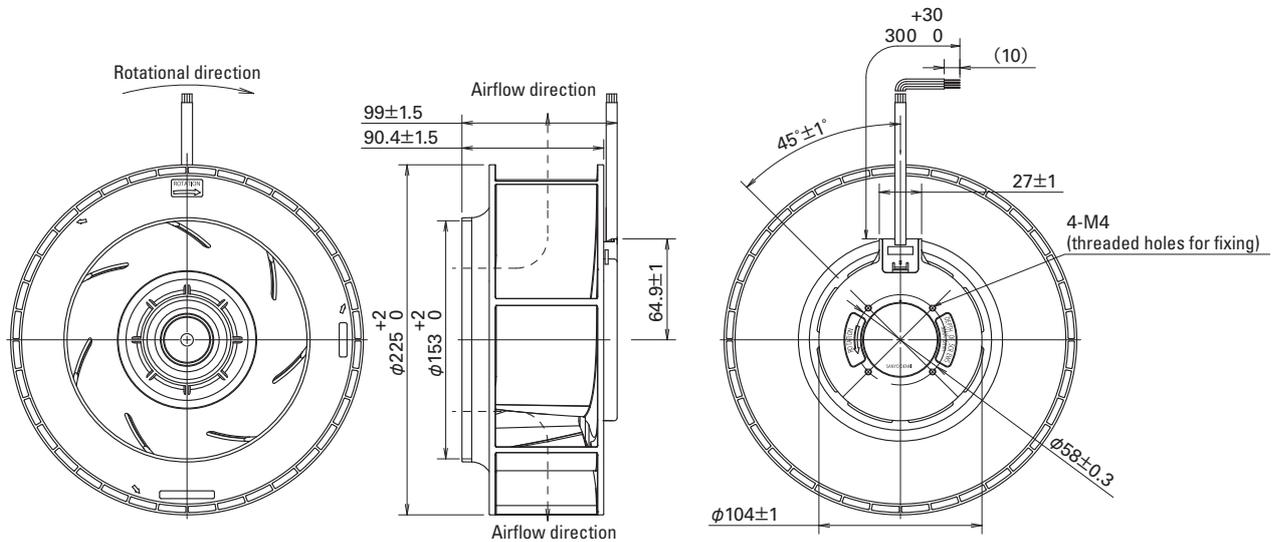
"San Ace C225" 9TS type dimensions (unit: mm)
